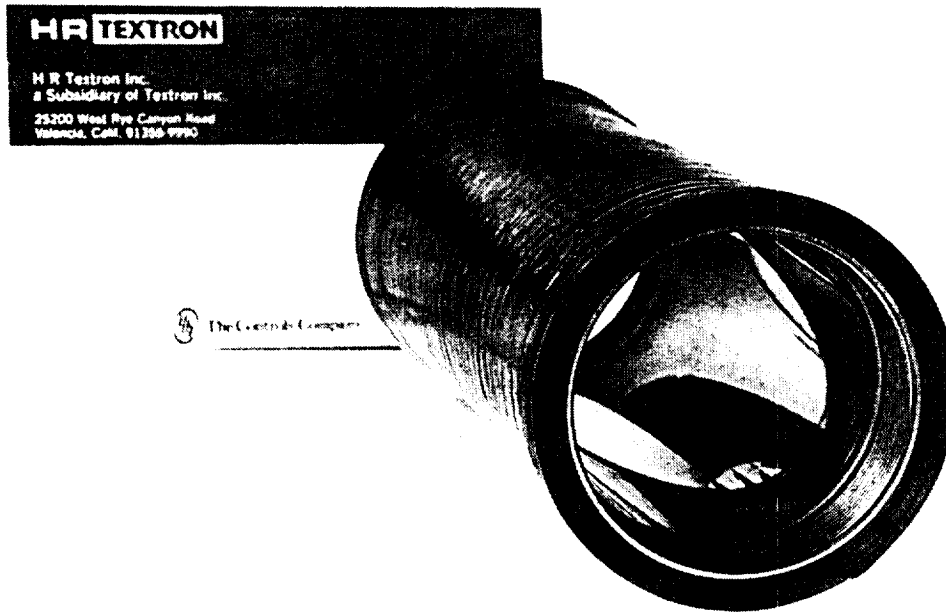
Carbon Epoxy Cylinder with Steel Liner and Thread Inserts
